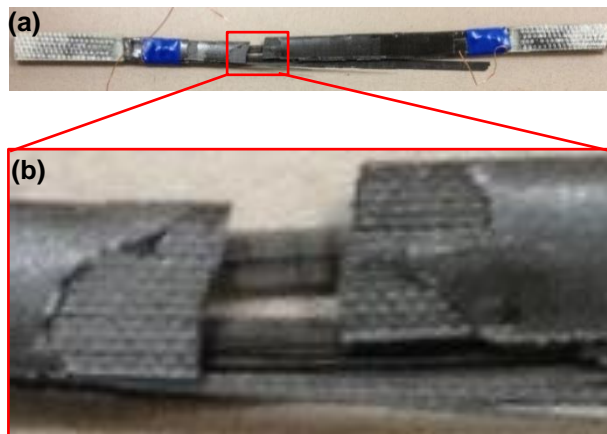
Failed test coupon for uniaxial tensile testing and impact testing: (a) four-ply ($0^\circ, 90^\circ, 90^\circ, 0^\circ$) IM7/977-3 tensile test composite coupon; (b) close-up view of the failure surface after tension testing.
